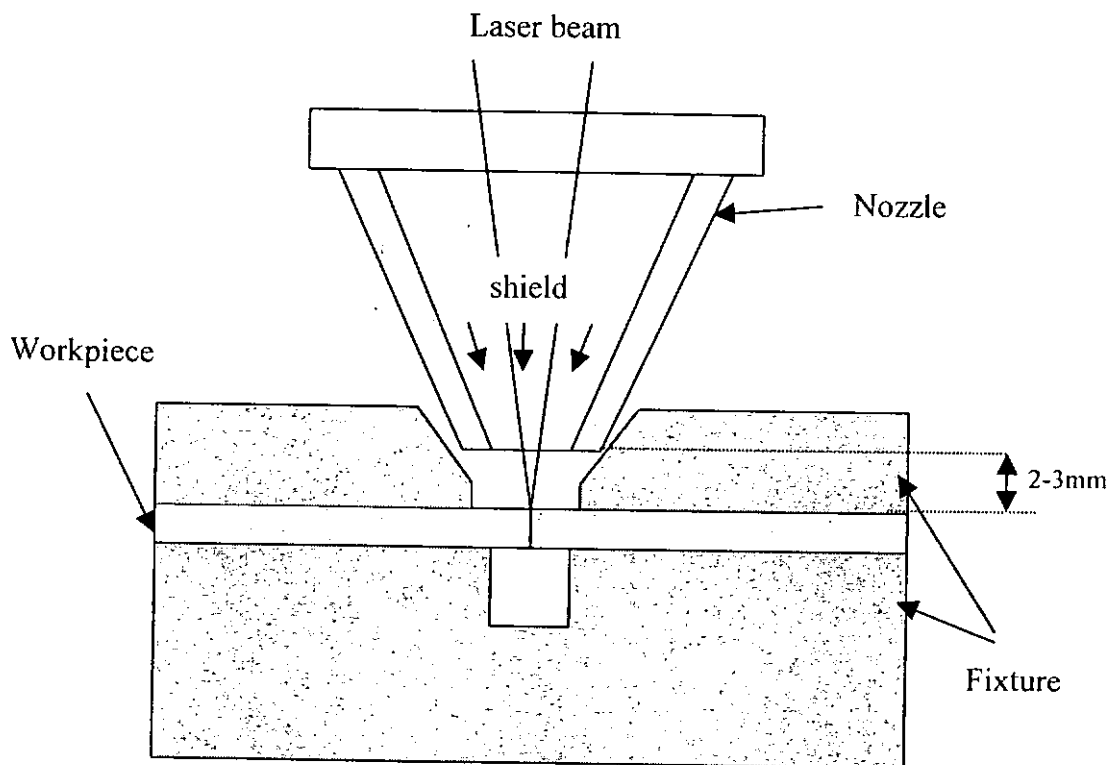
Nozzle and fixture setup for the laser welding experiment.
